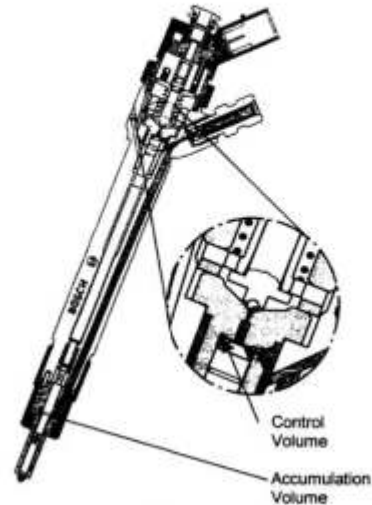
Common rail Injector with enlarged view on solenoid valve [8]
